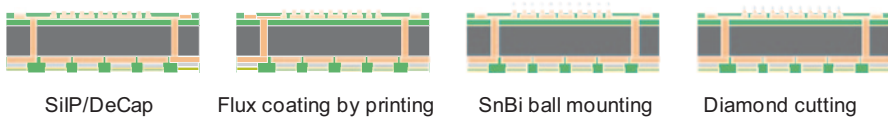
SnBi bumping by ball mount and diamond cutting
